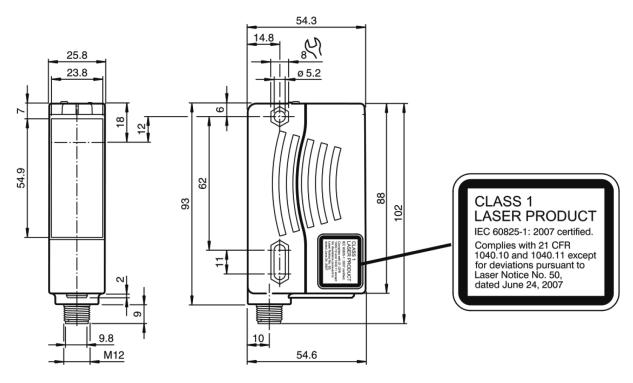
Laser Sensor (P/N: LGM-HEAD) Dimensions (mm)
